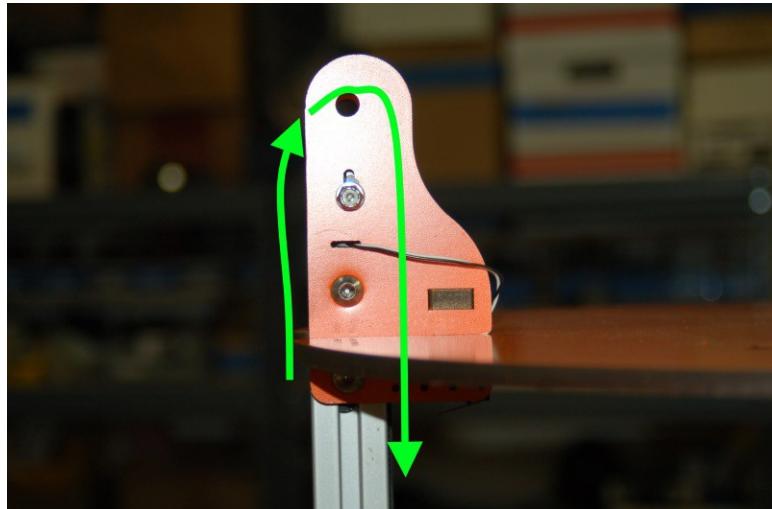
Belt path as it goes over the upper idler pulley.
